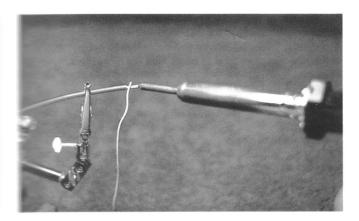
Tin the exposed wire using a small amount of solder.
